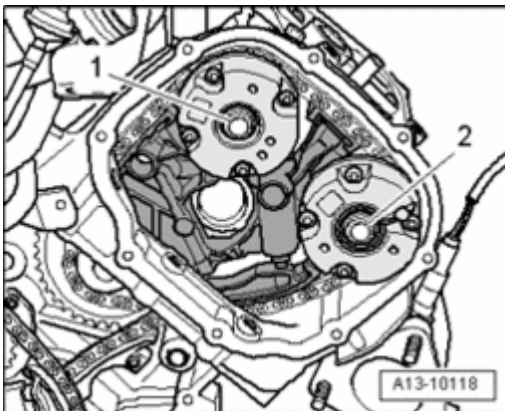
Removing Bolts For Camshaft Adjuster Using Multipoint Socket T10035
